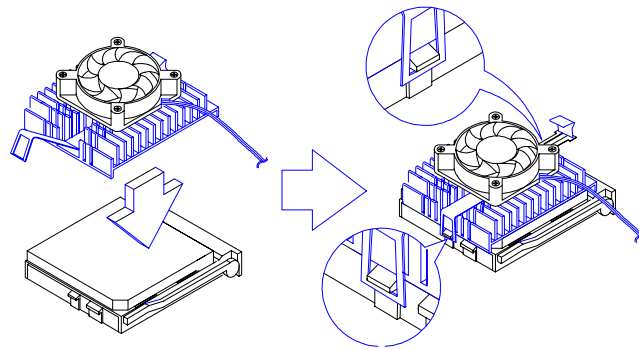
Attaching the Heatsink and Fan to the CPU
